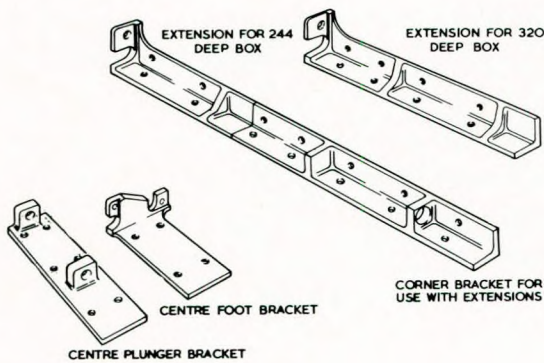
ADDITIONAL CASTINGS FOR LARGER BOXES
